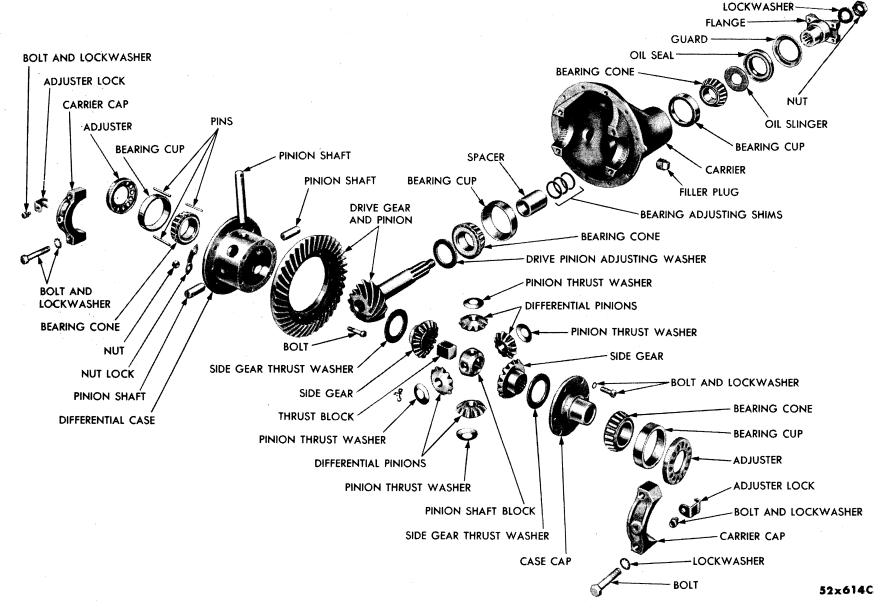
Rear Axle (Disassembled View) Standard Models, C 71 (Except Town and Country Wagon)
